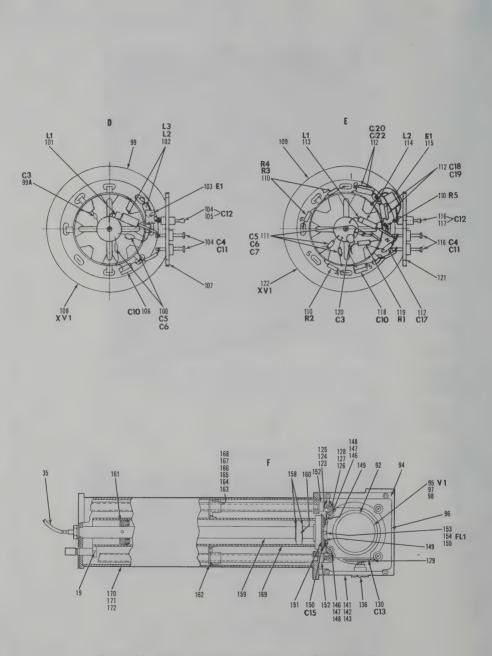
Cavity Assembly, Tuned, 2A7 (Sheet 3 of 3)
